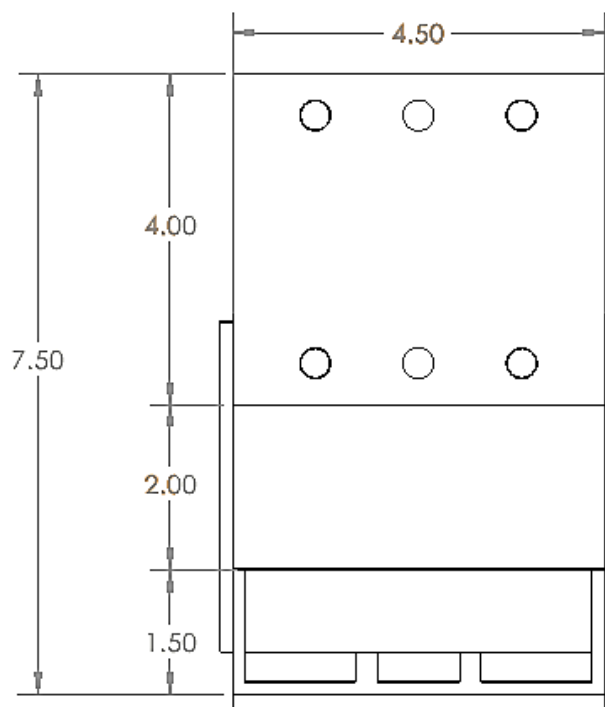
Line drawing of the leaf spring system. Initial mounting has the leaves constrained by 1" bands on the top and bottom to prevent additional deflection.
